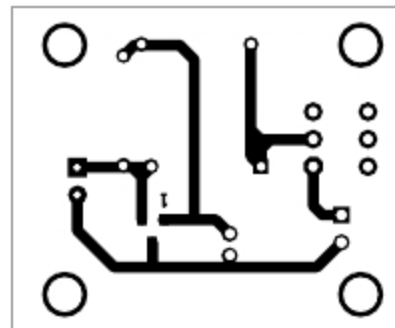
Actual-size PCB layout of torchlight in bootstrap mode
